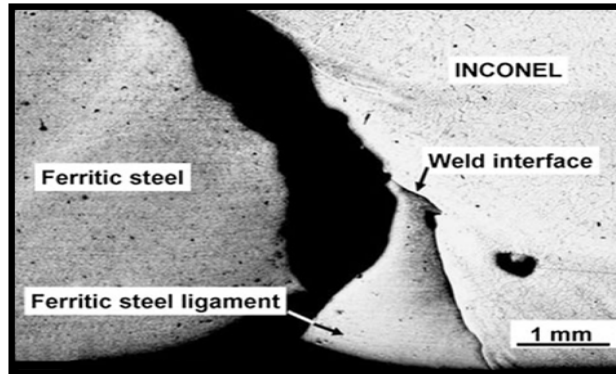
Creep failure at the P91 and Inconel 182 (filler) weld interface[10].
